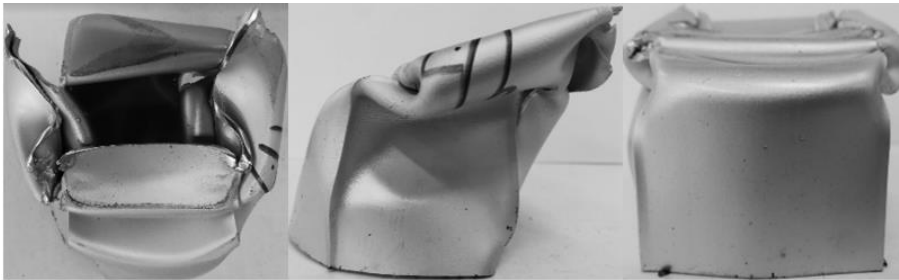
Final views of crushed specimen in test 4b under contact in edge
